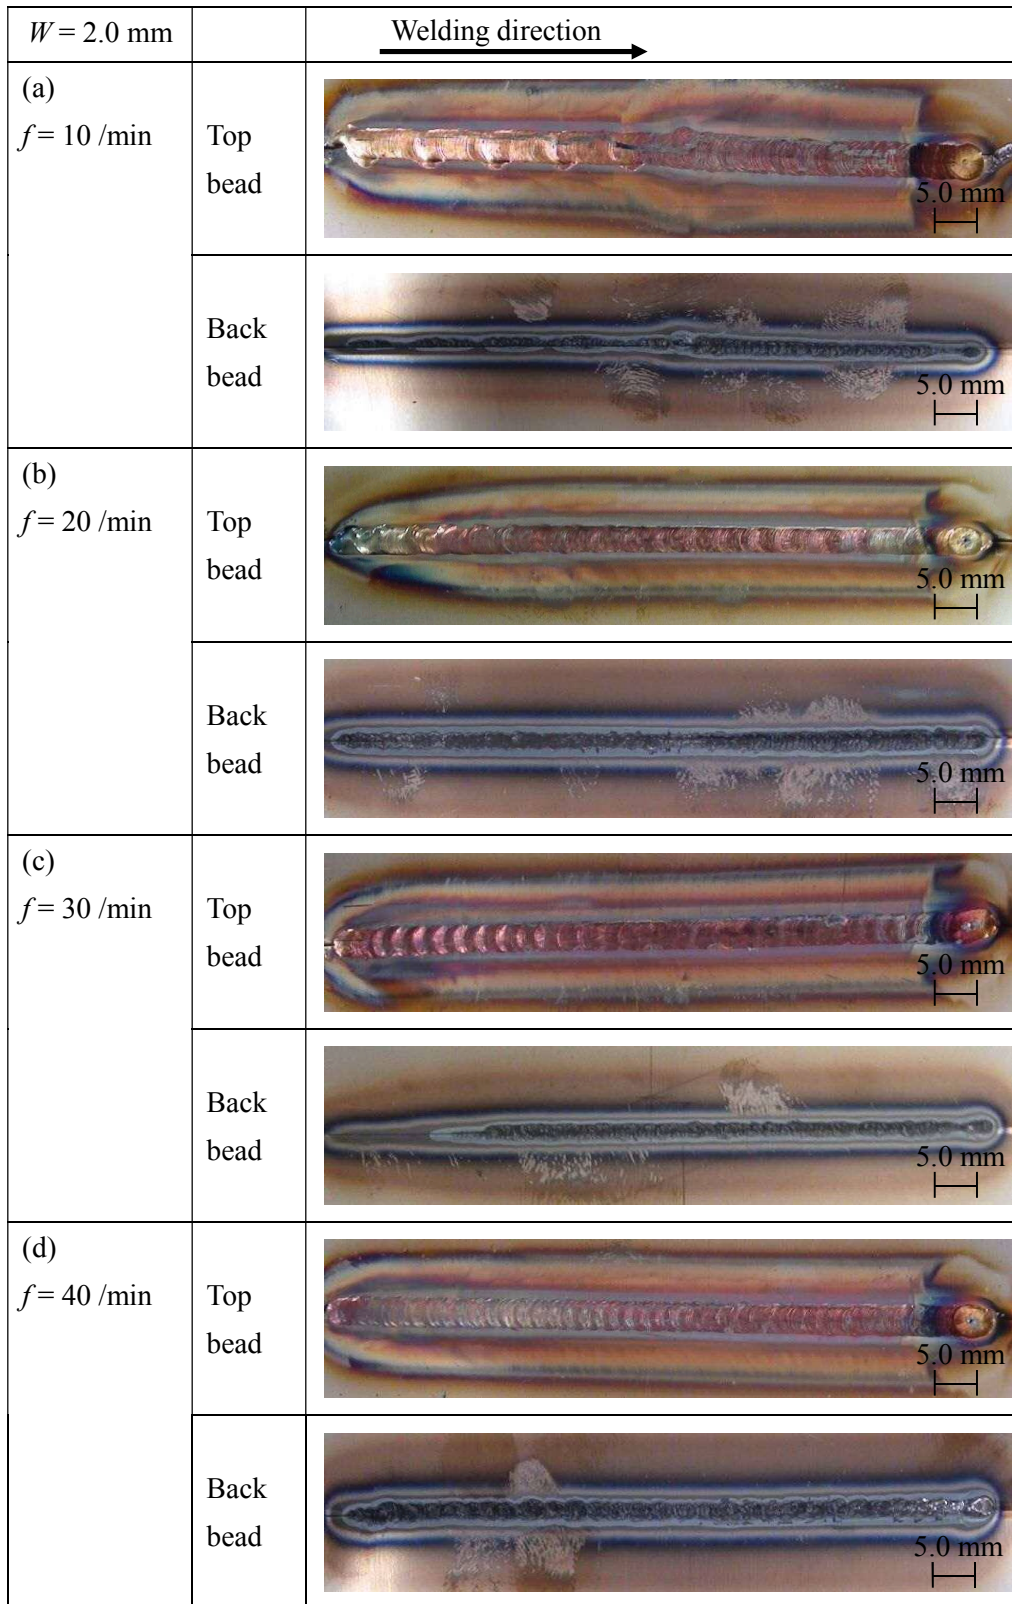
Appearance of hybrid welding beads using laser weaving ($W = 2.0 \text{ mm}$)
